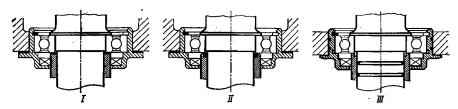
Sealing cylindrical mating surfaces (vertical shaft)
